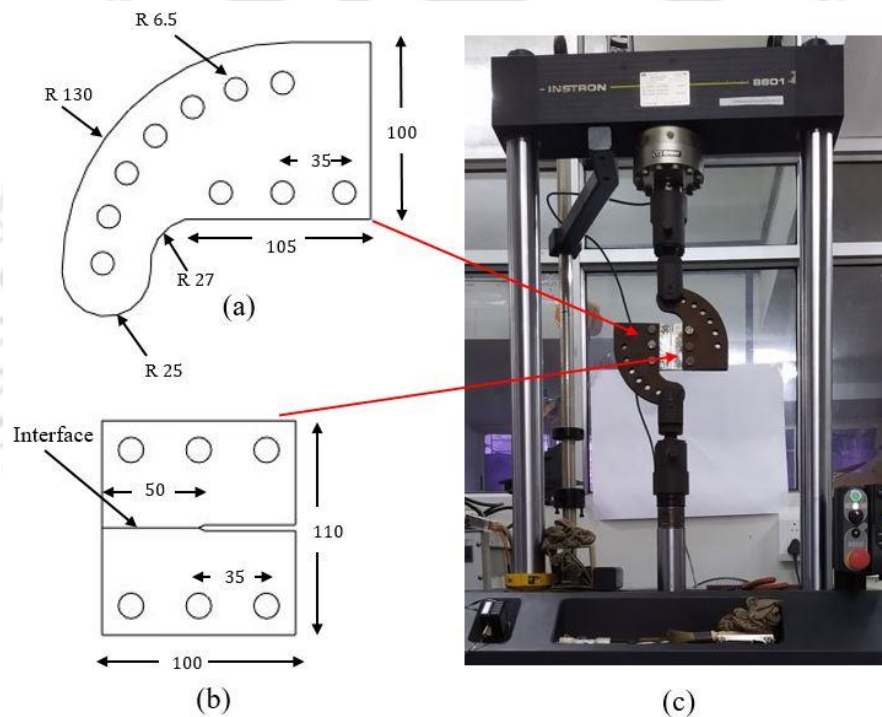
Schematic dimensions of the (a) Fixture, (b) Specimen, and (c) Experimental setup
